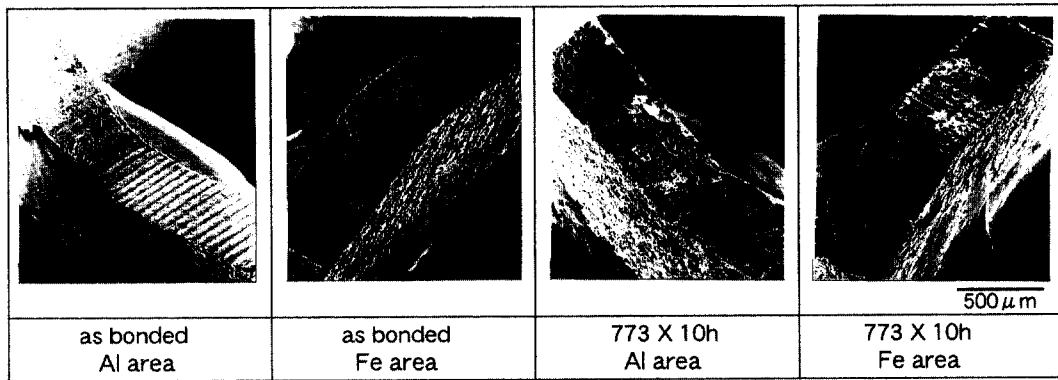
The fracture surface after the triple bending test of upset welding test specimen(SUH31 and AC4C) observed by optical microscope.
